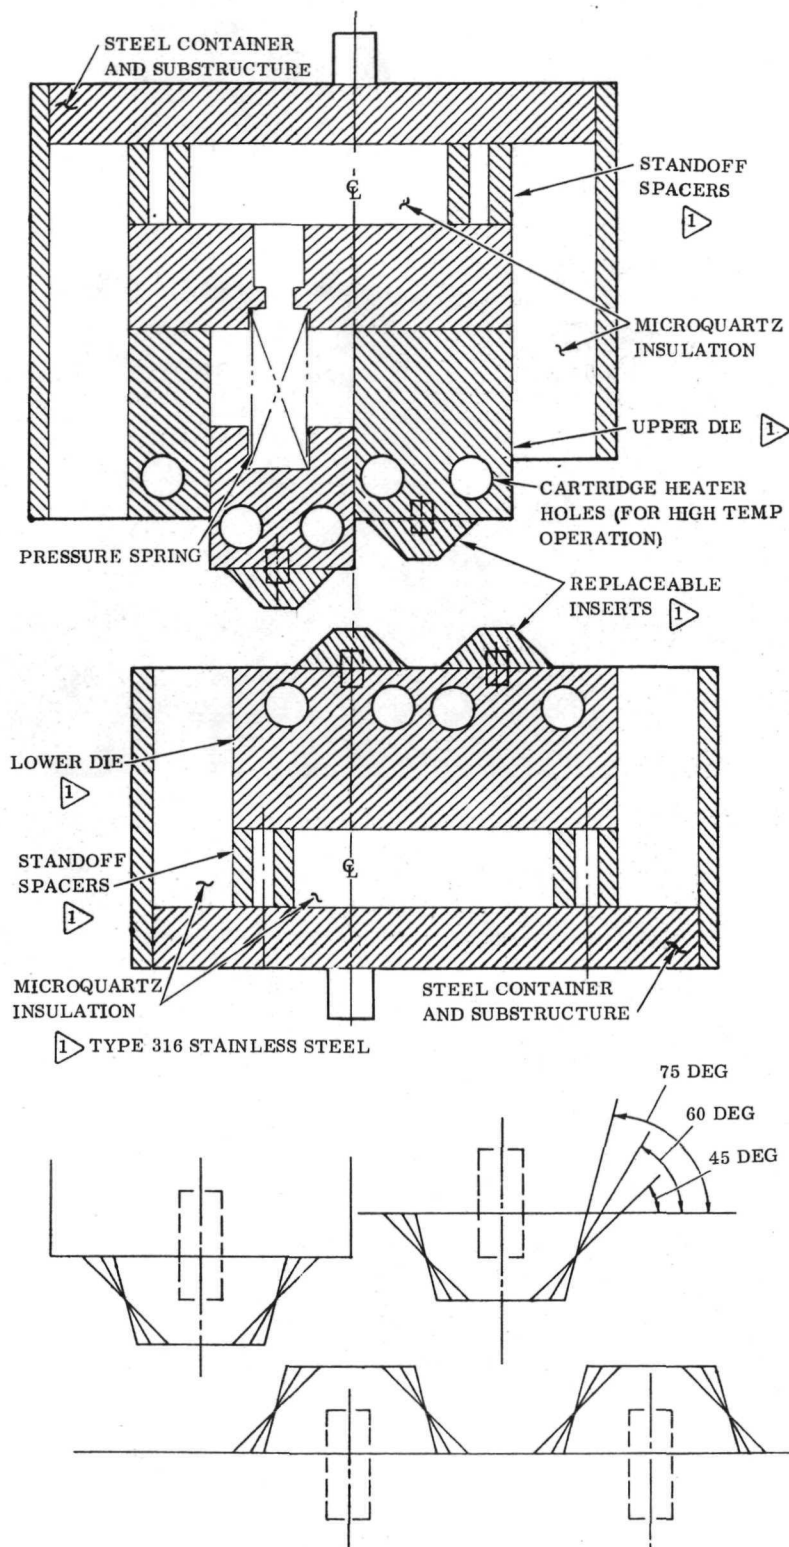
Corrugation Die Assembly with Replaceable Inserts
